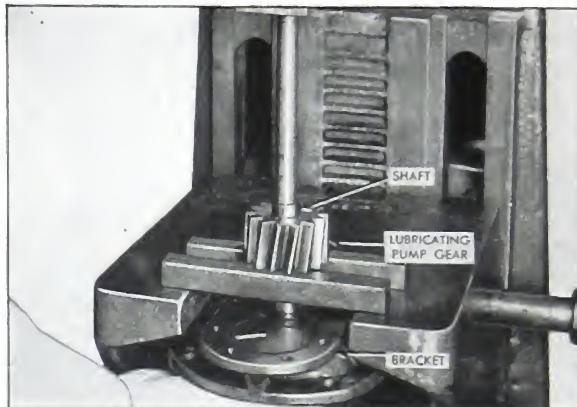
Pressing lubricating oil pump gear from shaft
